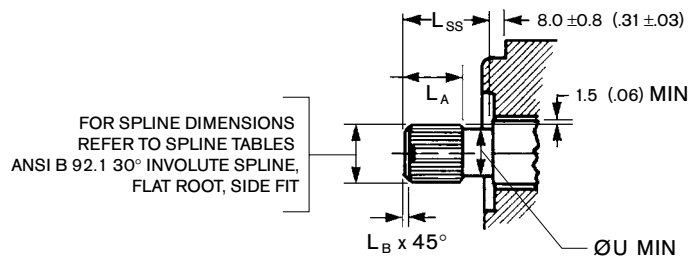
DIMENSIONS OF 30° INVOLUTE SPINE SHAFTS
